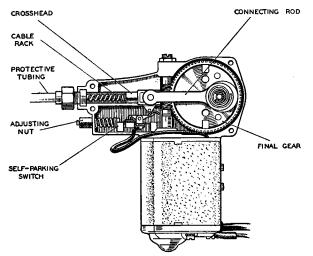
Showing the DR3 wiper motor with cover plate removed.
